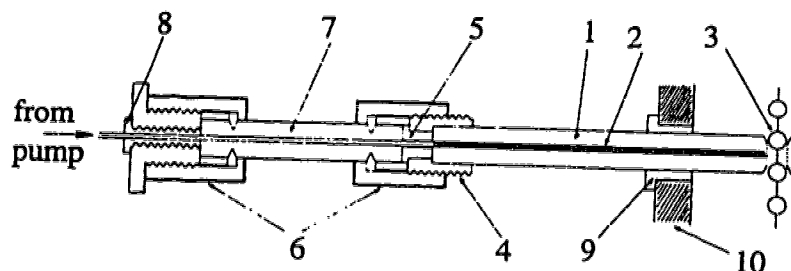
Detailed cross-section view of sample delivery port. 1, thick wall, glass capillary tube; 2, tungsten wire; 3, bead chain conveyor; 4, bolt epoxied to capillary tube; 5, frit; 6, Cheminert glass-to-teflon unions; 7, glass capillary tube; 8, Cheminert teflon tube fitting; 9, Swagelok fitting; 10, wall of sample chamber [49].
